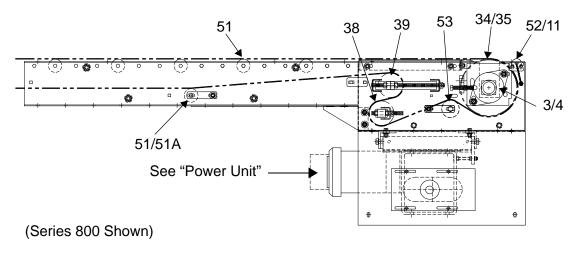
End Drive - Series 600 and 800 with Take-Up
